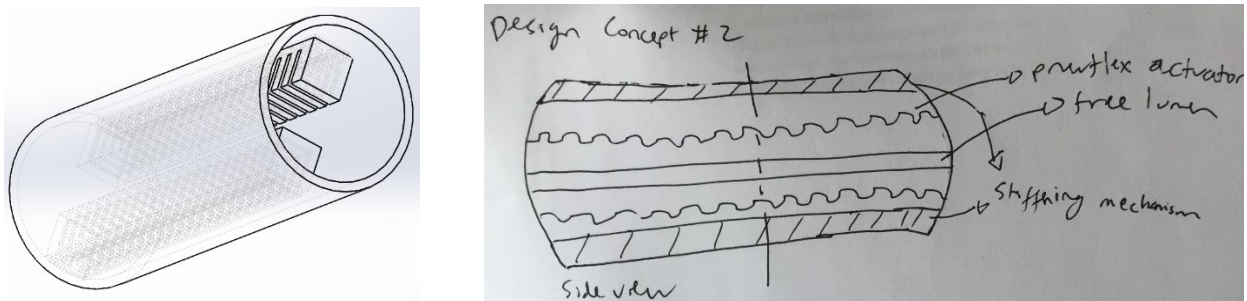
Design overview of soft endoscopic robots using antagonistic pneu-net actuator, (right) solidworks image, (left) concept drawing
